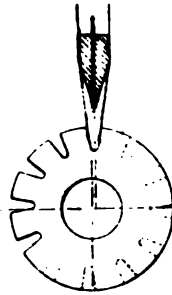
Cutting Backed Off Mill having Spiral Teeth.
